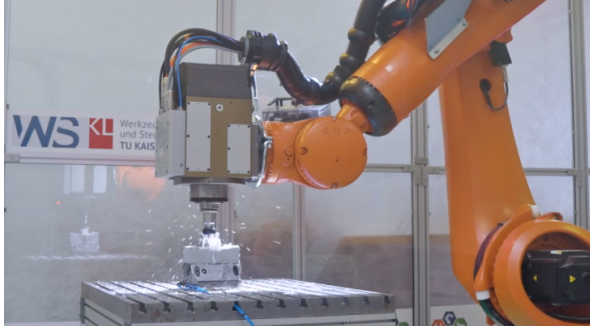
Skill-based milling using an industrial robot and attached milling spindle
